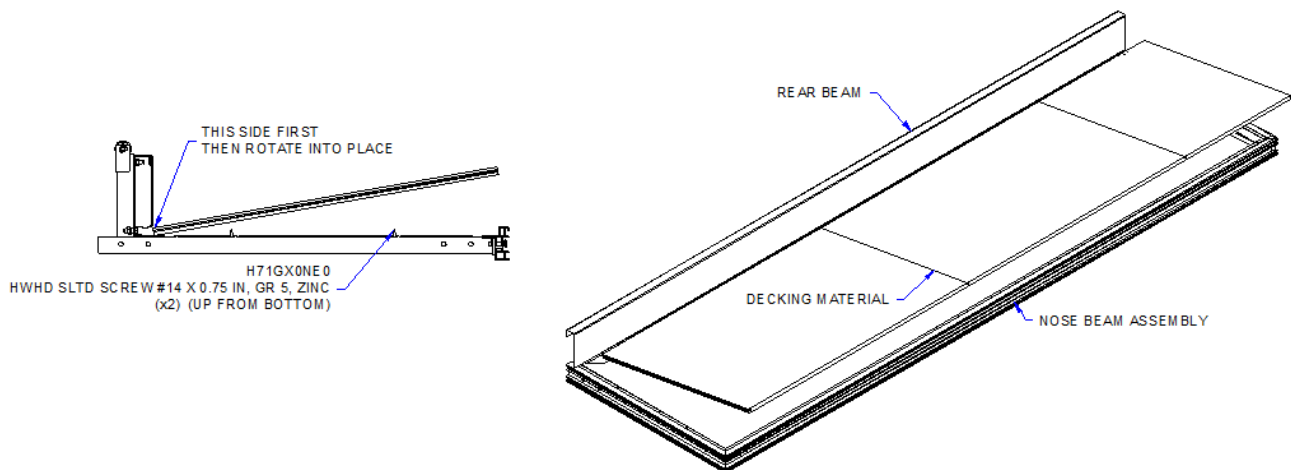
6" Post Column Brace Deck Support Connection
